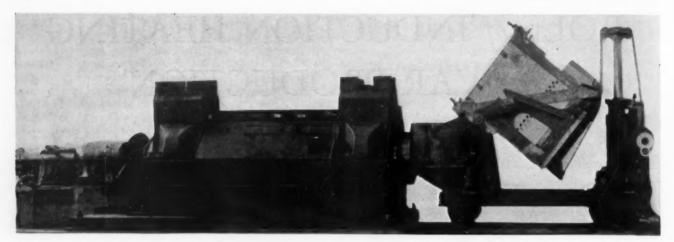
CENTRIFUGAL GUN-CASTING MACHINE WITH INDUCTION FURNACE IN POURING POSITION (Courtesy U. S. Ordnance Department)
